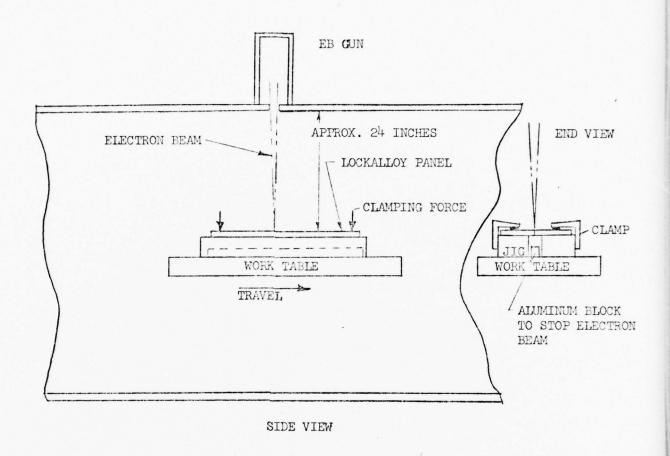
DIAGRAM OF ELECTRON BEAM WELDING SET-UP
